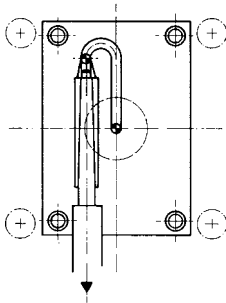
Assembling procedure for the curtain-ring rollers inside the mold
